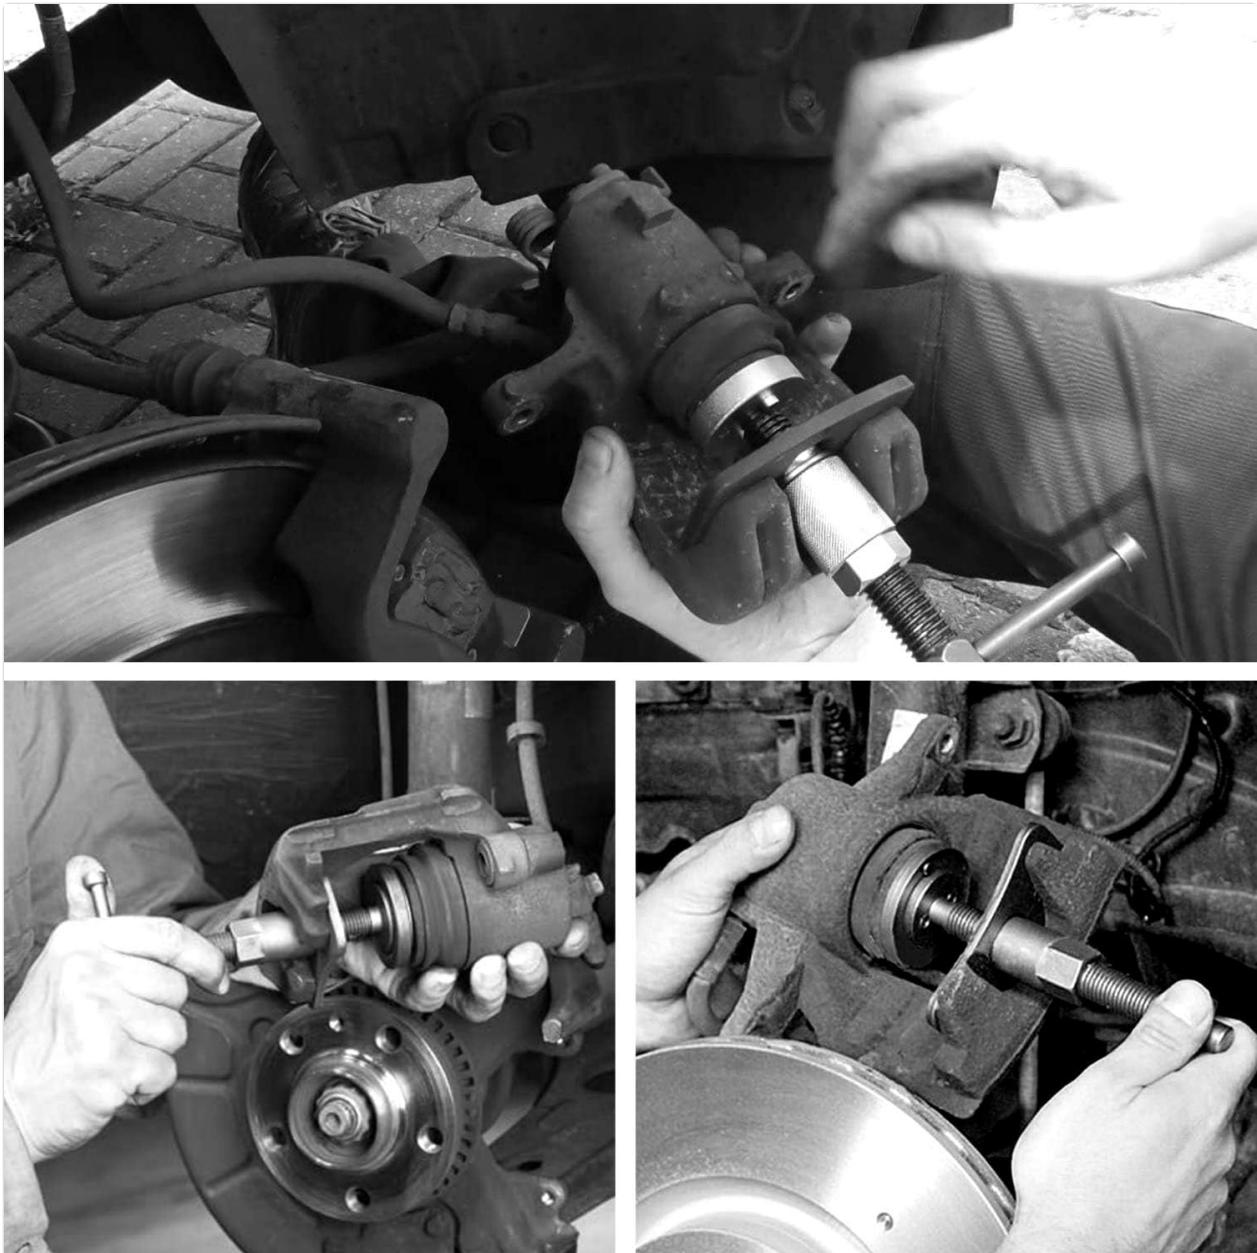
Various stages of the brake piston reset tool being used to retract a brake piston on a vehicle.
